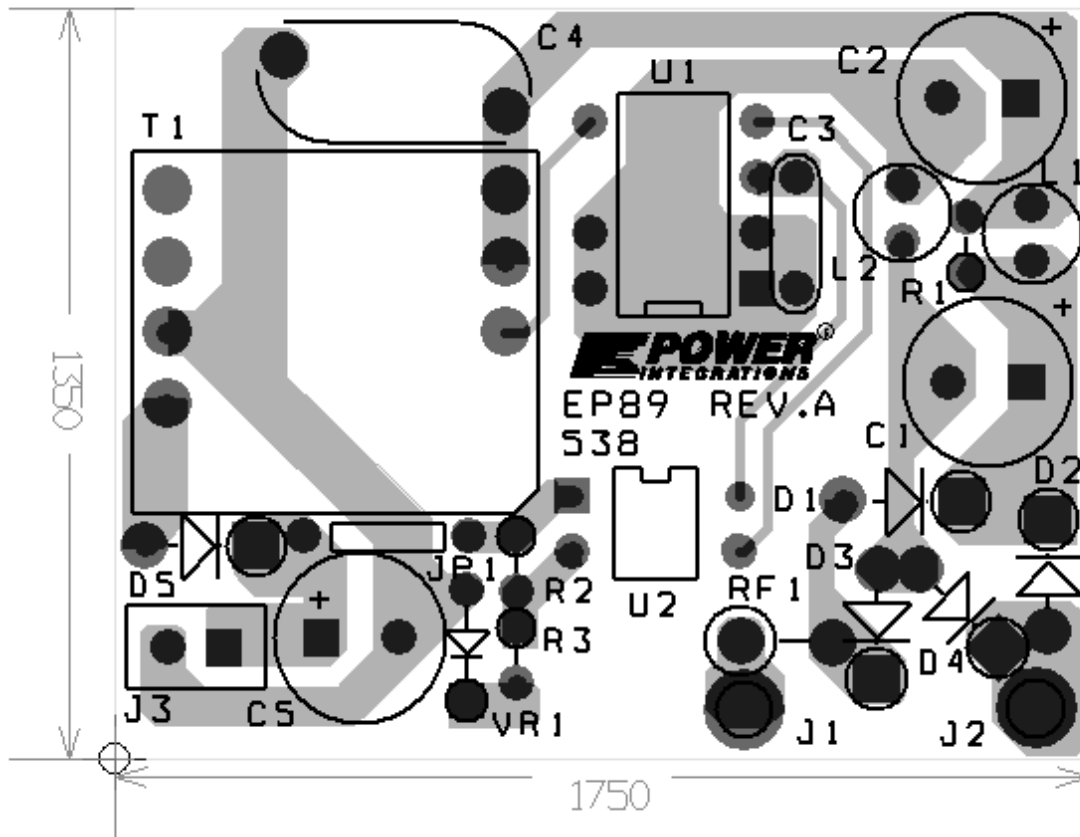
Printed Circuit Board Layout (dimensions in 0.001”).
